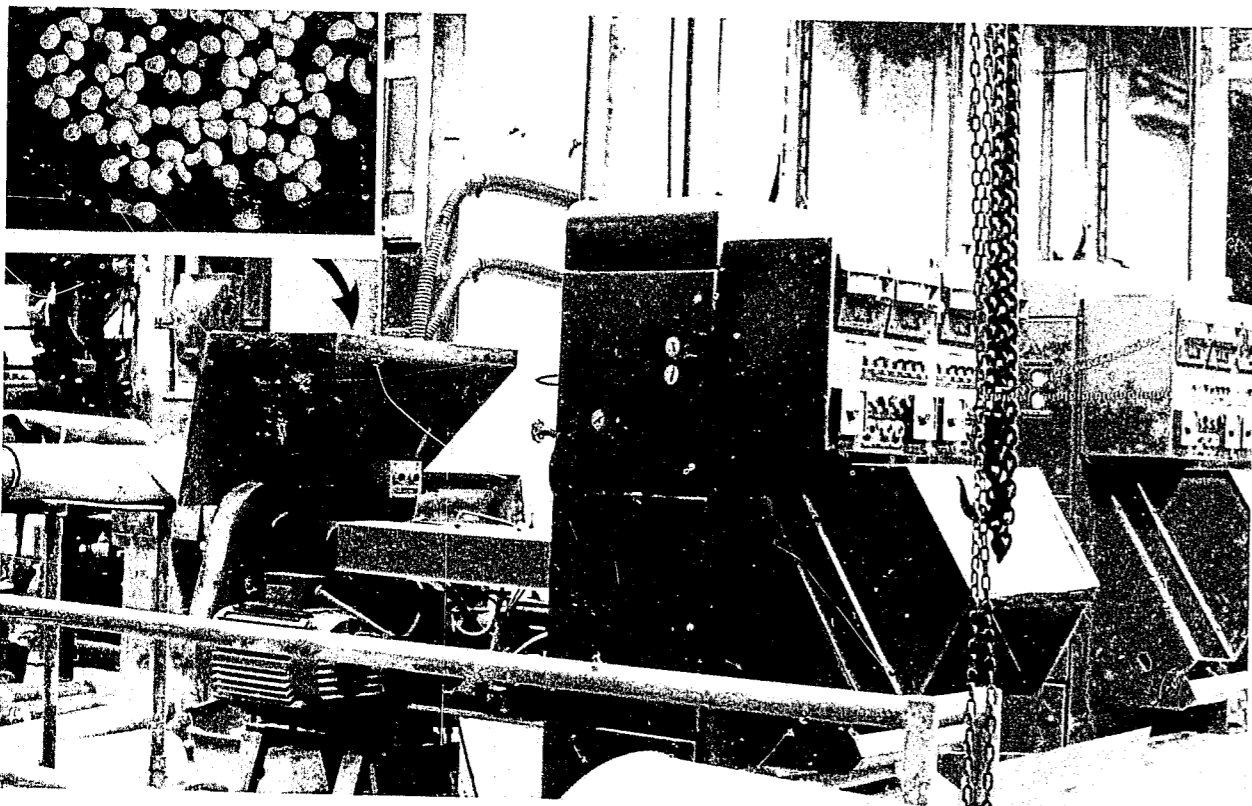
Injection mold machine. Insert shows thermoplastic pellets.
